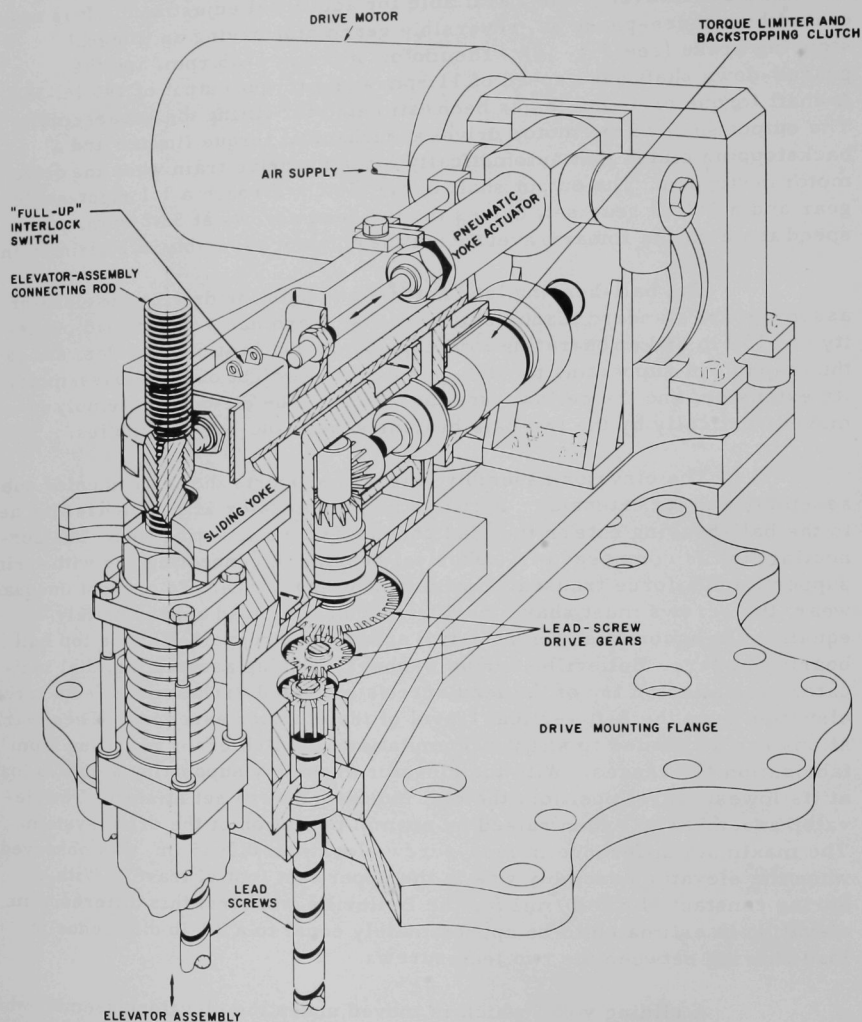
Drive of Drive Assembly for Instrumented Subassembly
